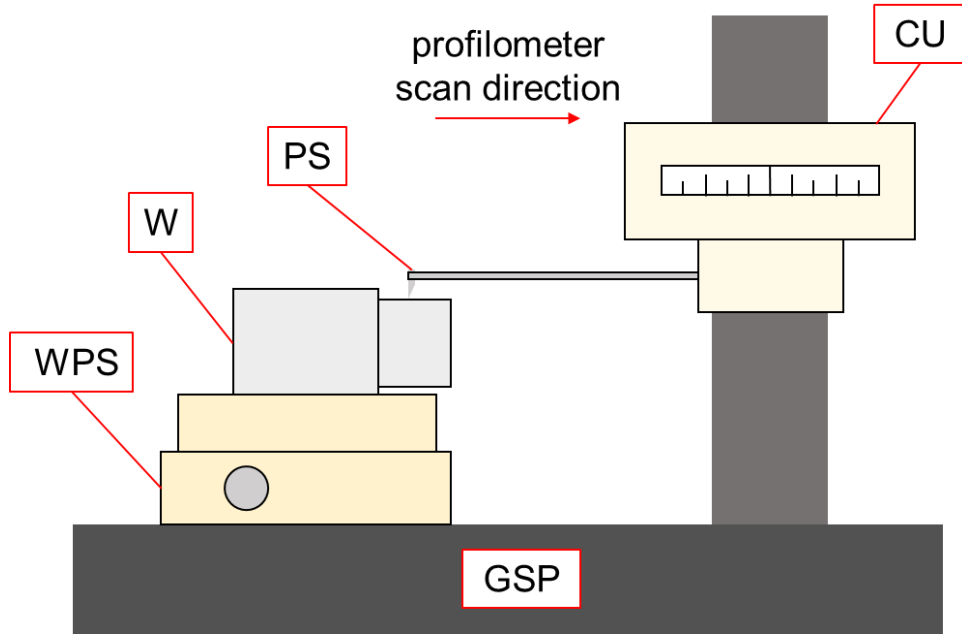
Schematic of the Mitutoyo Contracer surface profilometry setup including granite surface plate (GSP), workpiece (W), controller unit (CU), and profilometer stylus (PS) and workpiece positioning stage (WPS).
